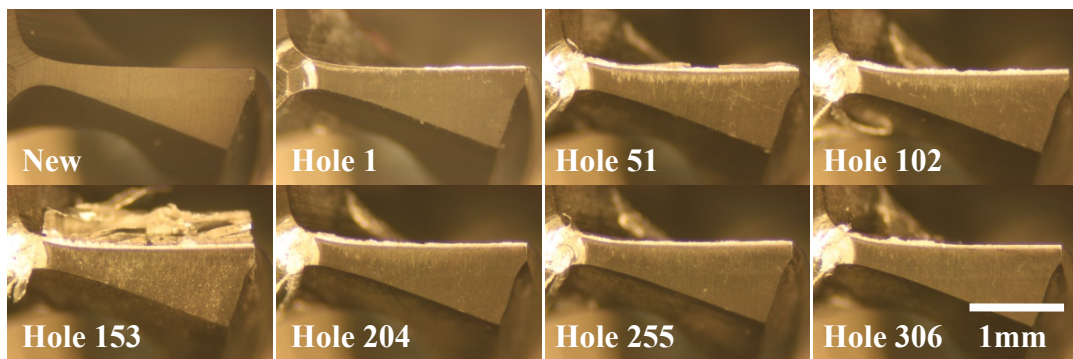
Tool wear micrographs of Graphit-iC™ drill under 3bar cutting fluid, 130m/min cutting speed (Test 3)
